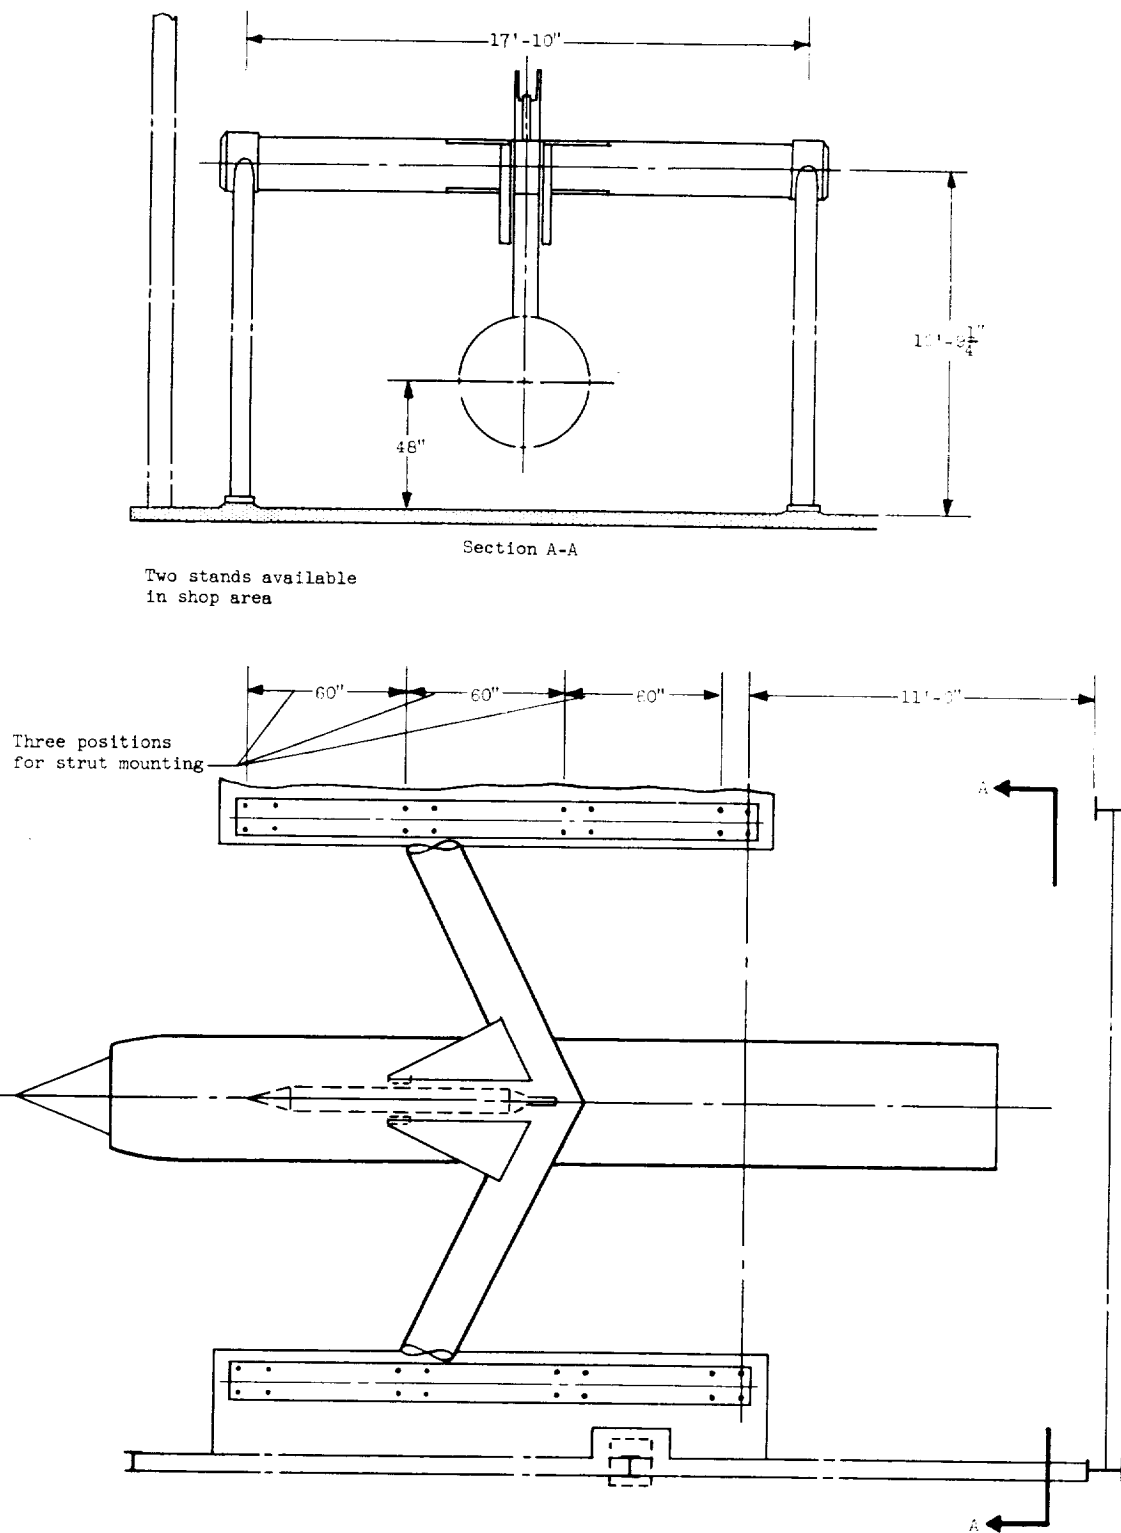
Shop stand for suspended models, Lewis Unitary Plan Wind Tunnel.
